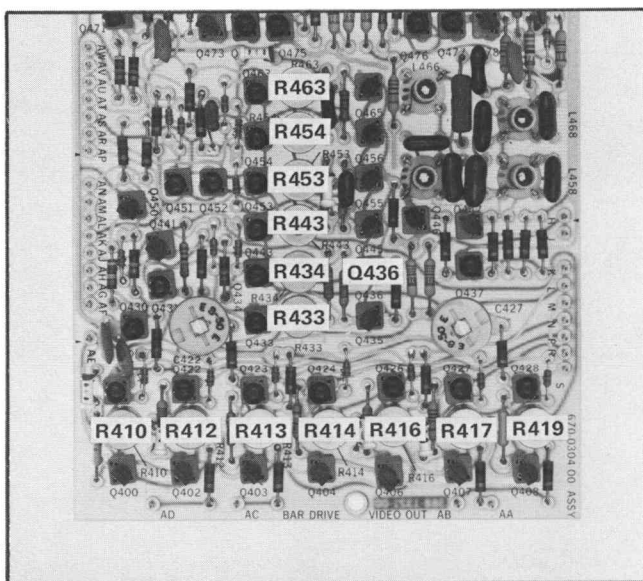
Transistor and adjustment locations on the Bar Drive and Video Out board.
